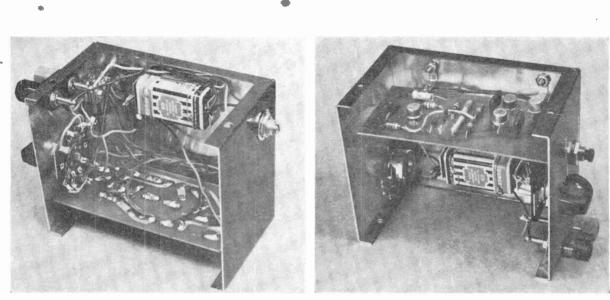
The bottom cover has been removed to show how printed circuit board is mounted in the cabinet. In view at left, the unit is on its left side. In view at right, the unit is turned on its right side.
